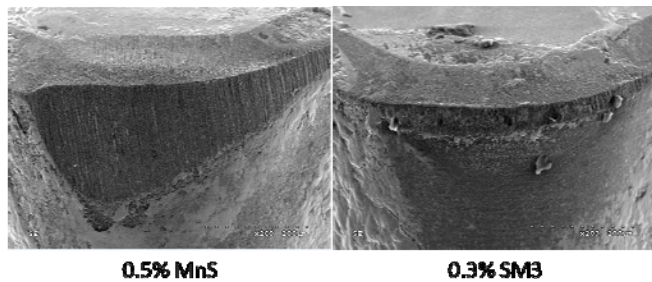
Comparison of inserts used to machine Fe-0.45P material. The amount of components machined for each insert was 400
